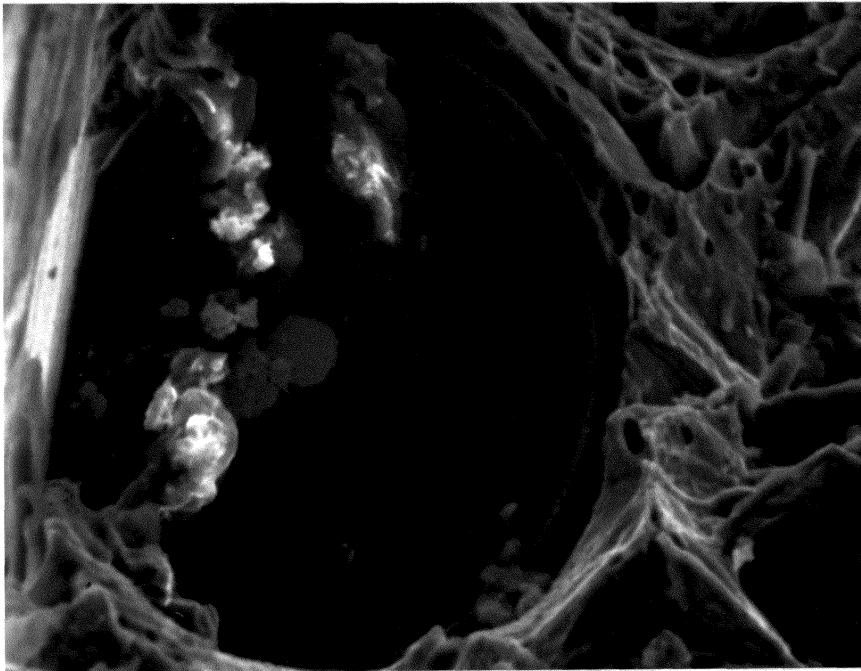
Fracture surface of boron-aluminum composite showing unique fiber fracture morphology. T4 heat treatment. Magnification 500x.
